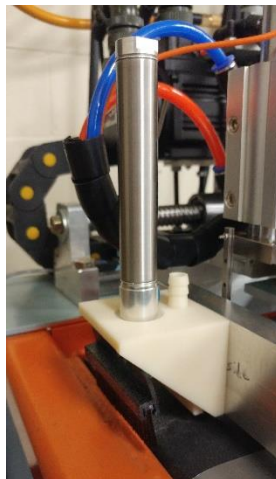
Brush and pneumatic. A nozzle to mount a vacuum to is also visible to the right of the pneumatic
